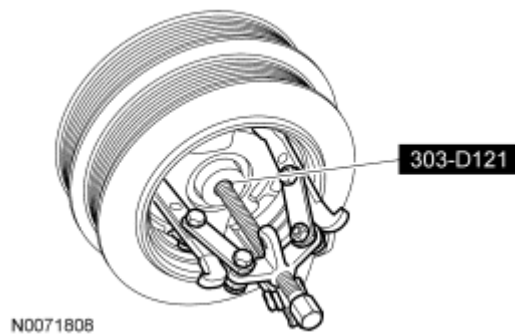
Removing Crankshaft Pulley Using 3-Jaw Puller
